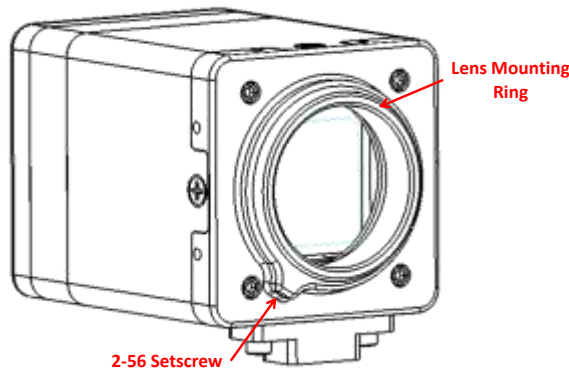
Location of Setscrew to Loosen Lens Mounting Ring for Focus Adjustments
